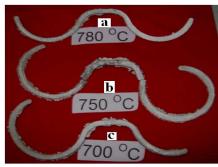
Spiral test casting of A713 alloy without scrap addition, poured at a) 780 $^{\rm o}$ C, b) 750 $^{\rm o}$ C c) 700 $^{\rm o}$ C (Left side coated and right side uncoated)
